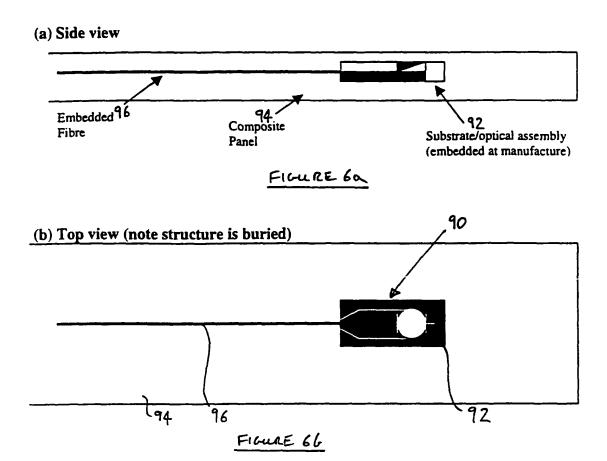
Embedded fibre and substrate assembly. Such an assembly could comprise a number of optical processing elements.
